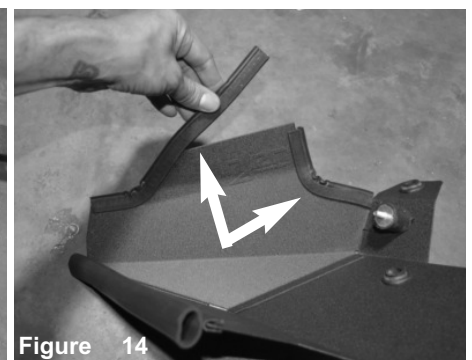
Now install the bulb edge trim to both sides of the top of the heat shield.
